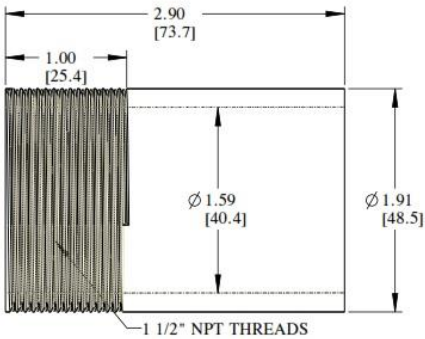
Dimensioned Drawing of the Pipe Nipple
